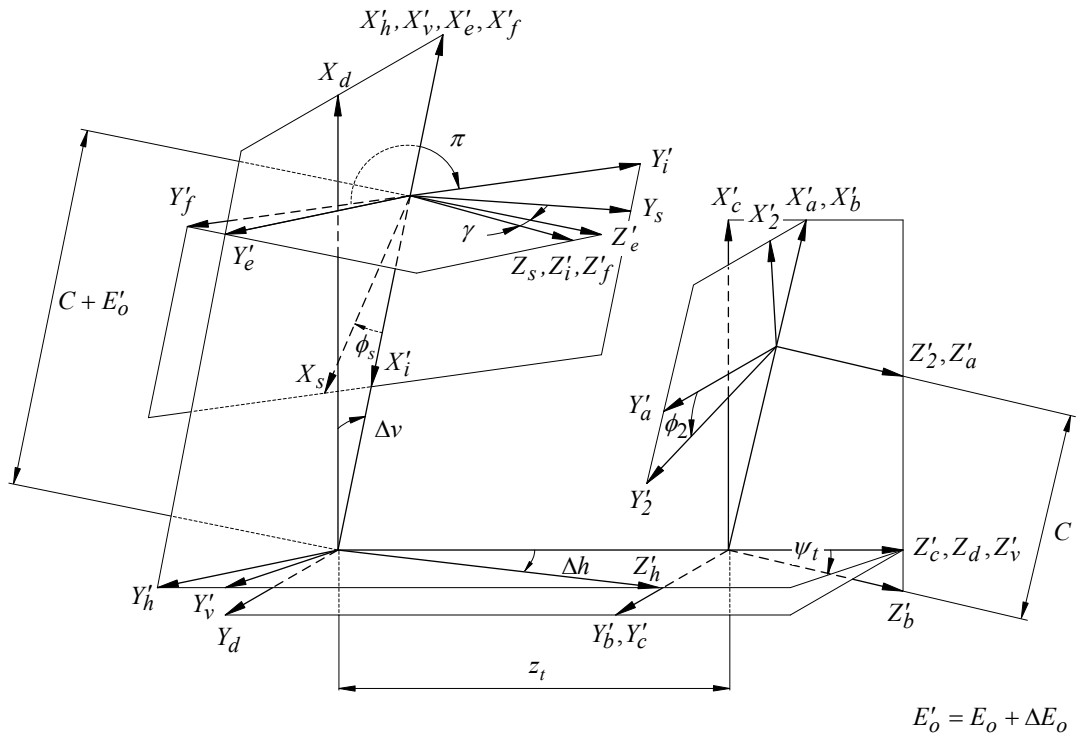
Coordinate system of the gear shaving machine with considerations of cutter assembly errors.
